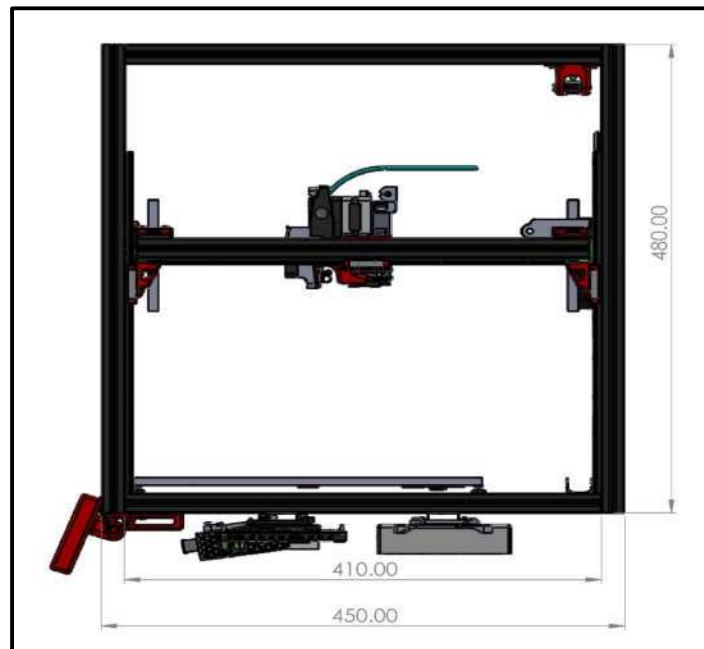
Right Side View with Dimensions (All Dimensions in mm)
